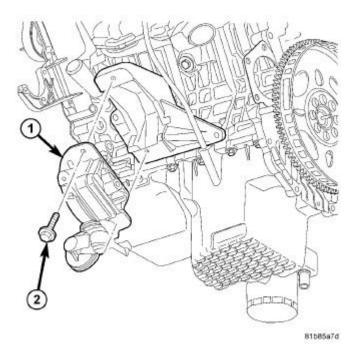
Left Engine Mount & Bolts Courtesy of CHRYSLER LLC
